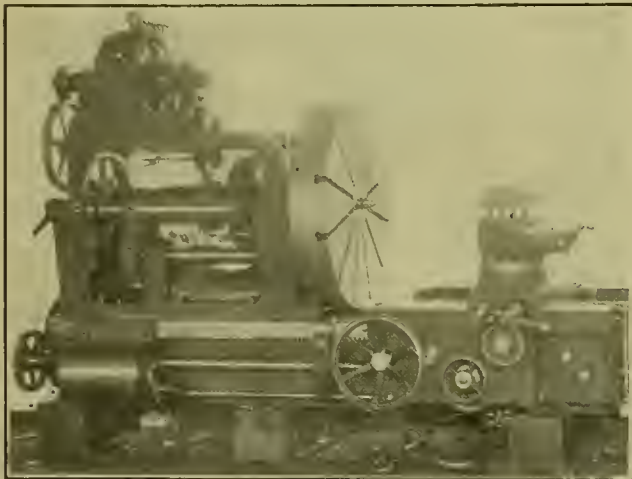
GEARED HEADSTOCK DRIVE UPON A 48-INCH POND LATHE.— 15 H. P. WESTINGHOUSE MOTOR ARRANGED FOR VARIABLE-SPEEDS.
